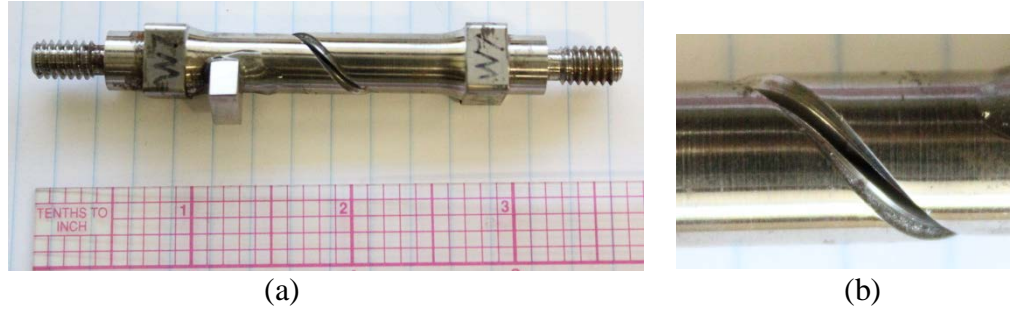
The failed SNTT welded material sample W7: (a) the entire view; (b) the local view of the failed sample.
